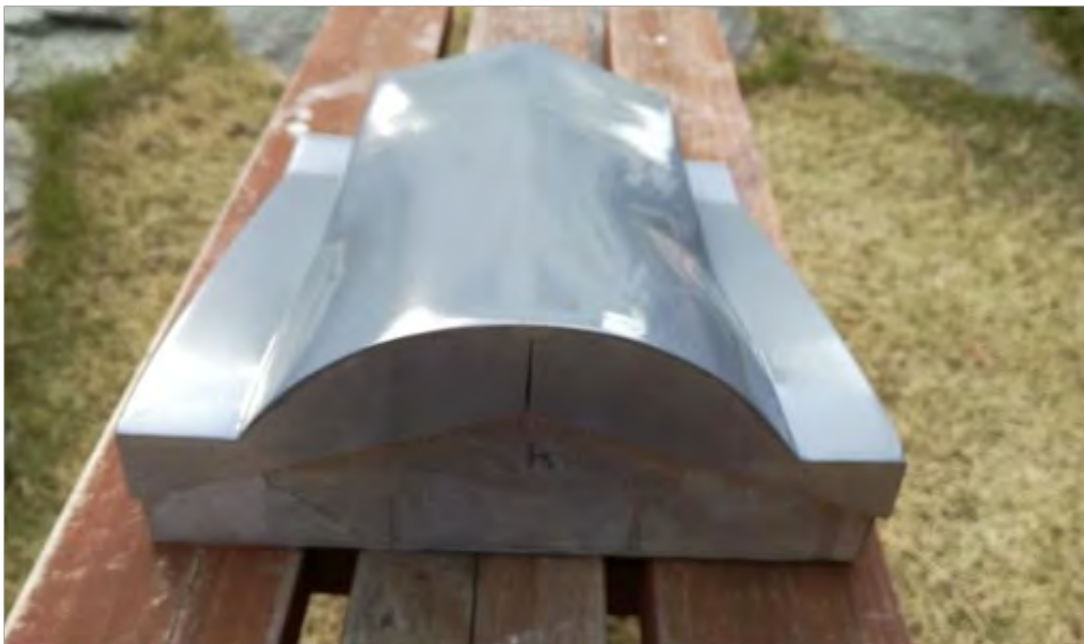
shows the finished wooden mold. The sides are wider and straighter than the actual dimensions because of the need to make plaster molds. I planned to cut out this part after the FRP molded part was made.
